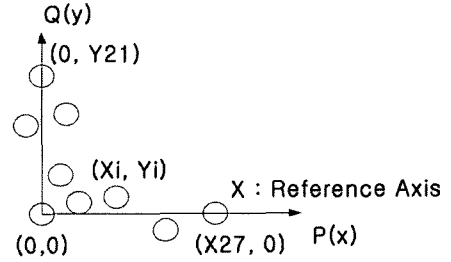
Hole-plate calibration using a standard CMM (Model Duck-In, Zodiac)
